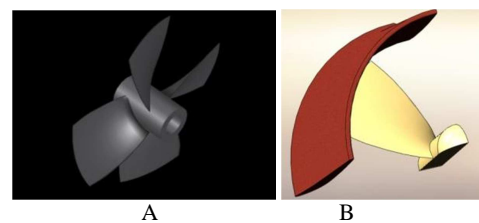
A) 3D model of Kaplan propeller B) ducted propeller Assembled in Solidworks
